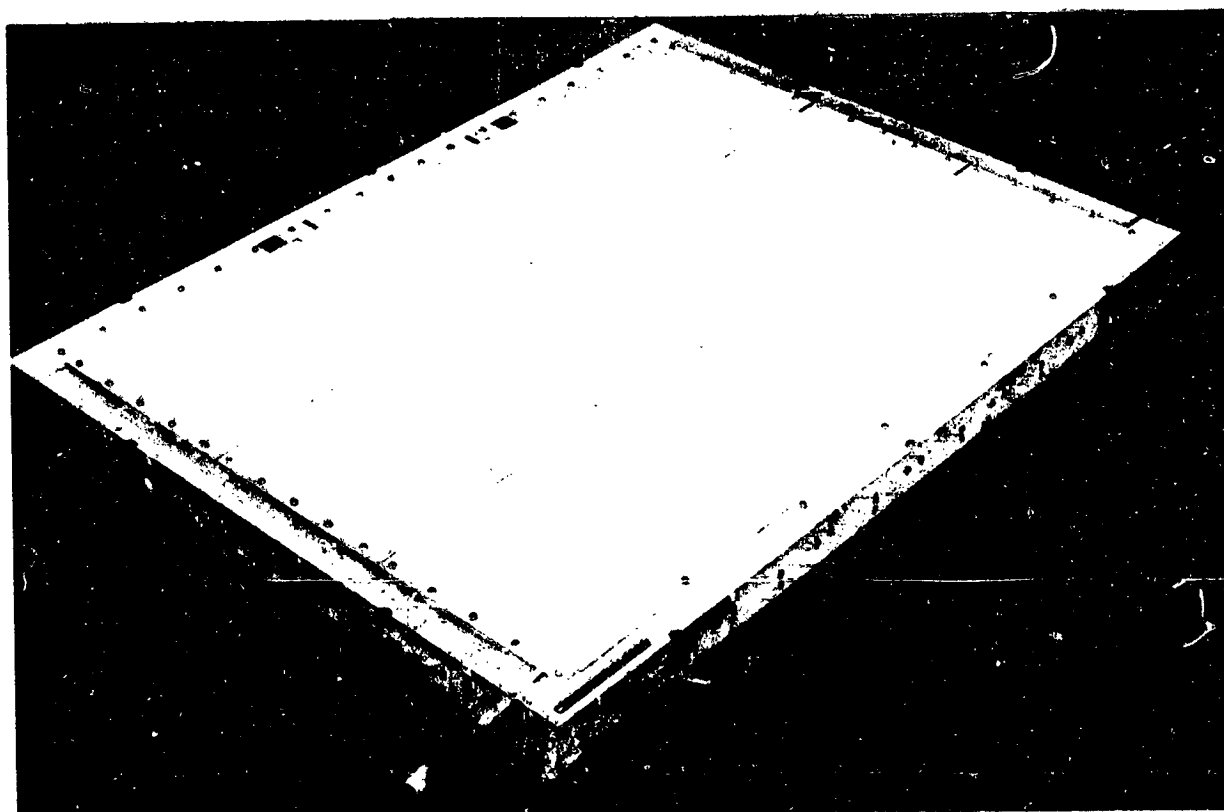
Nine-Panel TPS Test Specimen and Holding Fixture (137397)
